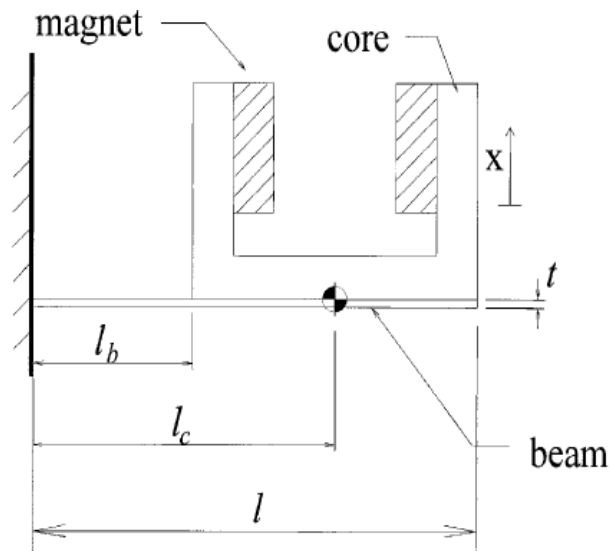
Dimensional drawing of beam/magnet assembly [14].
